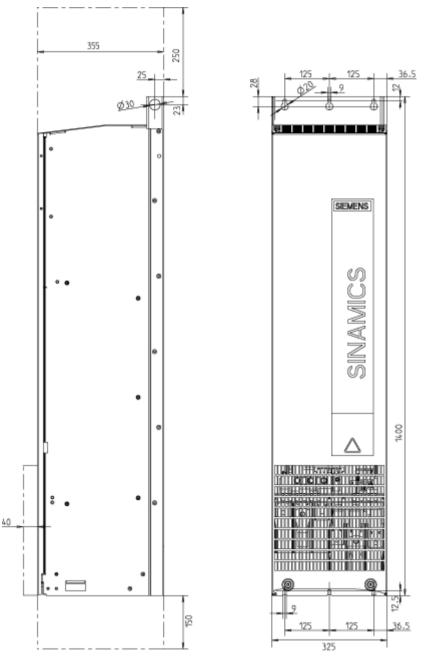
Dimension drawing for Active Interface Module, frame size FI Side view, front view
